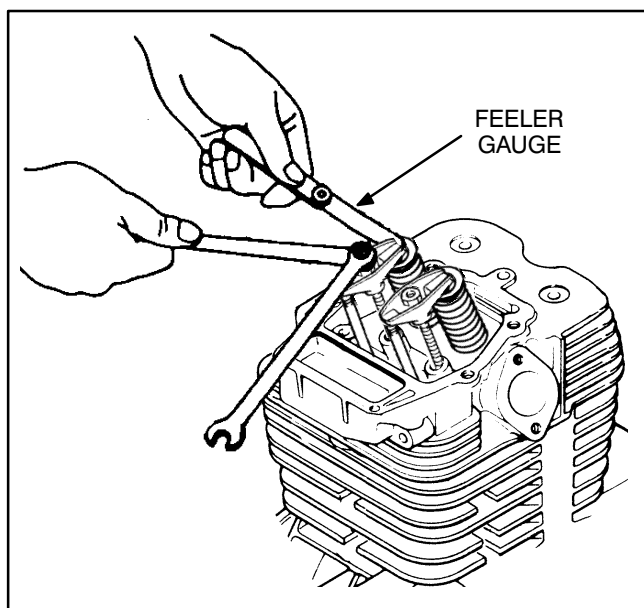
VALVE CLEARANCE ADJUSTMENT
